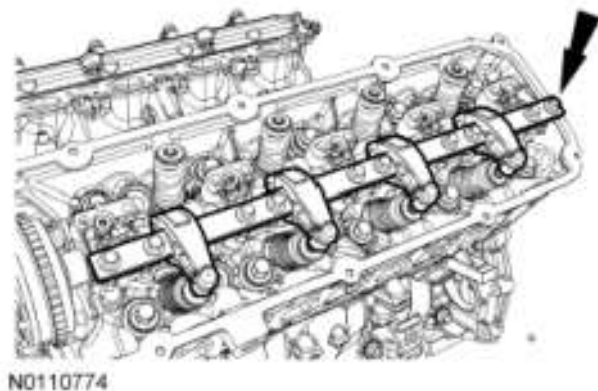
Locating LH Exhaust Rocker Arm Shaft Assembly
